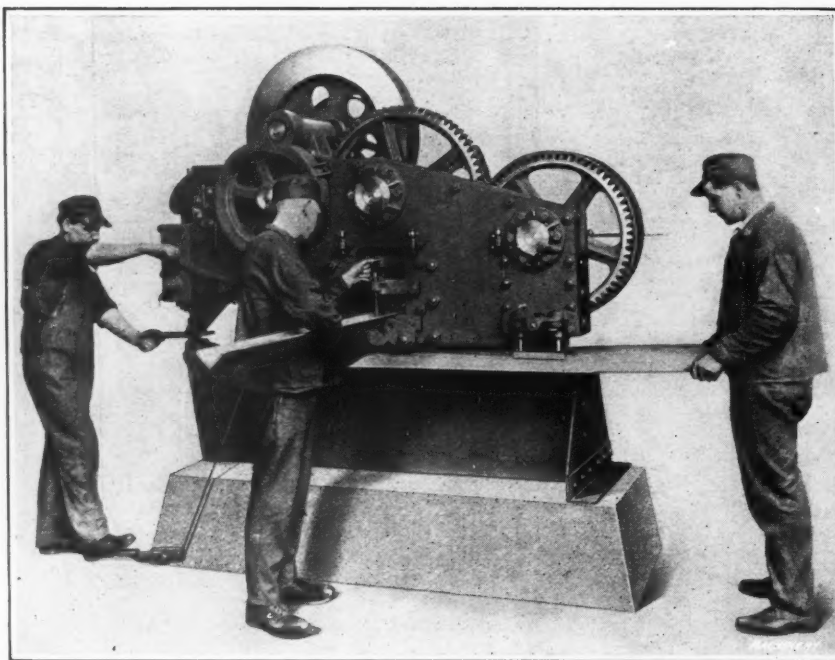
No. 25 Combination Slitting Shear, Punch, and Bar Cutter built by the Buffalo Forge Co. The Frame is made of Armor Plate
